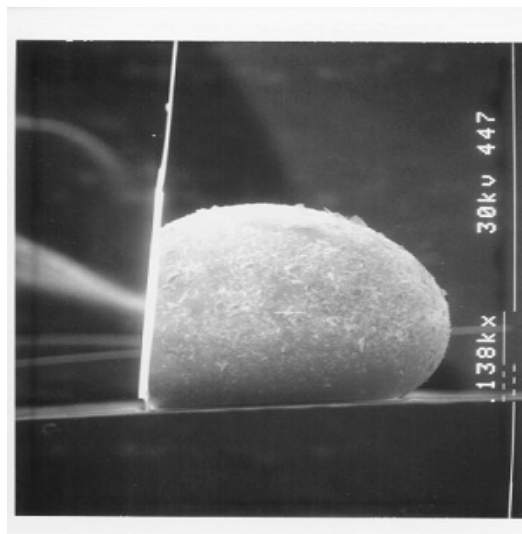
SEM image of the solder self-assembled hinge plate [12]
